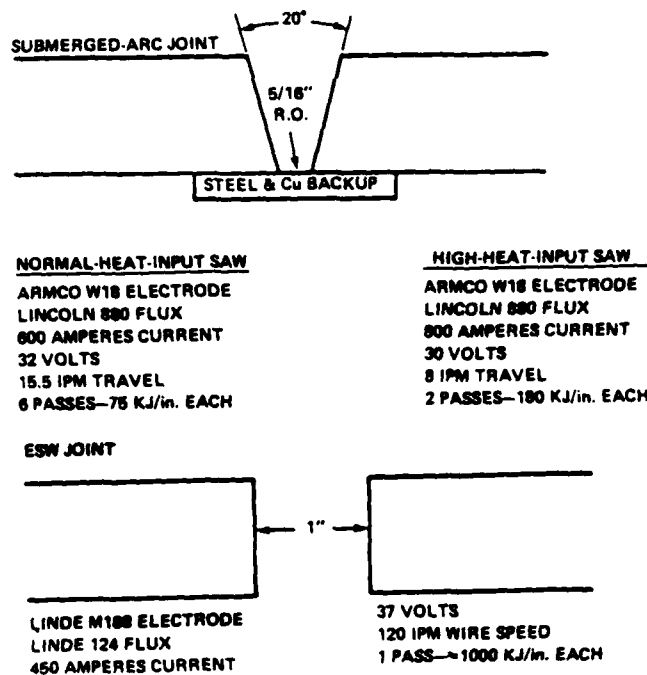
Joint configuration and Weld parameters used in current investigation
